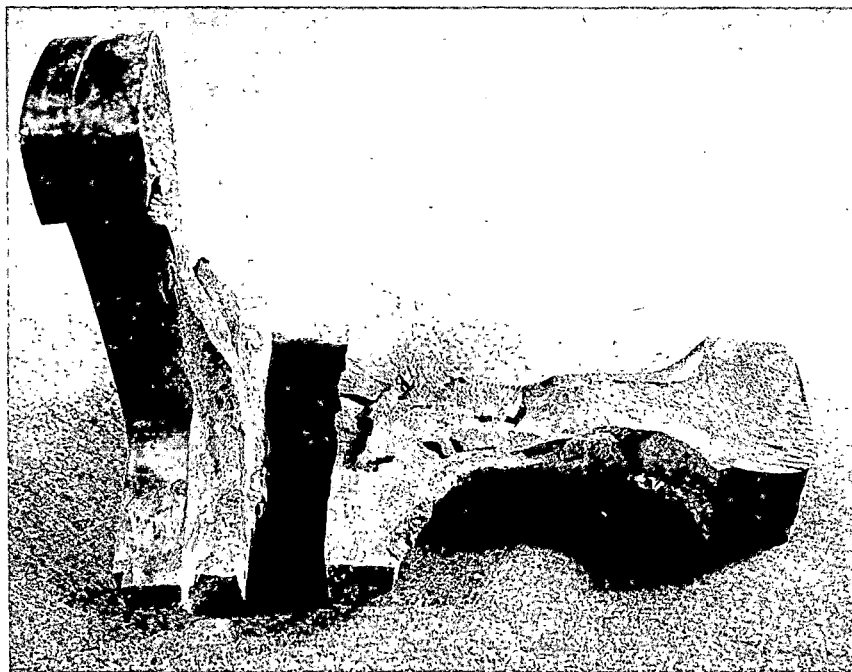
Failure specimen #1 opened to show the fracture surface.
